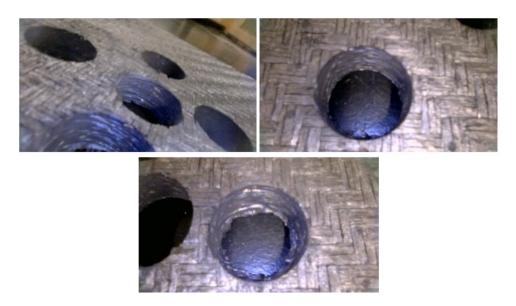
Holes drilled into unbonded Carbon/Carbon Sample
